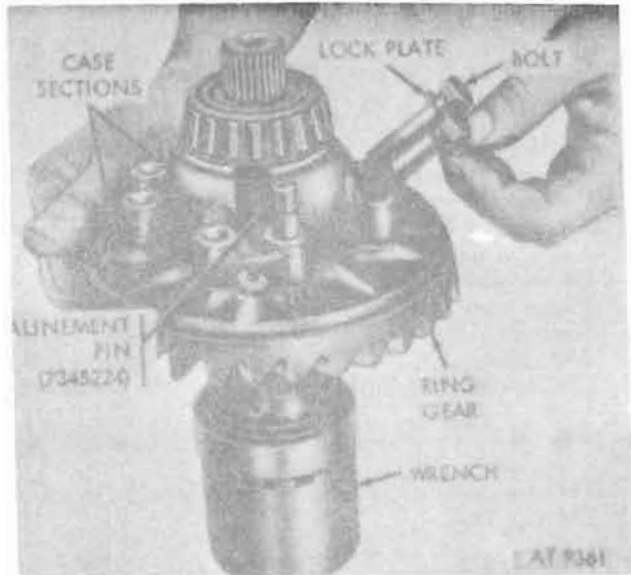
Using alignment pins (7345224) to assemble drive gear to differential case.
